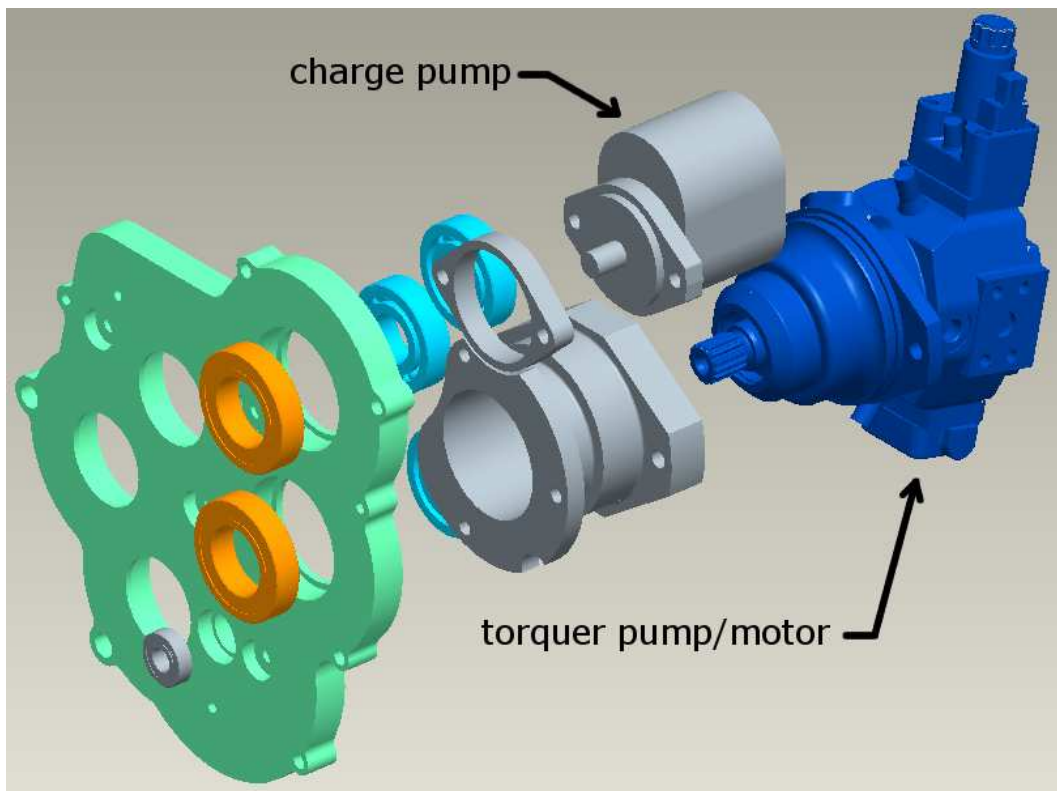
Exploded view with *torquer* hydraulic unit and charge pump.
